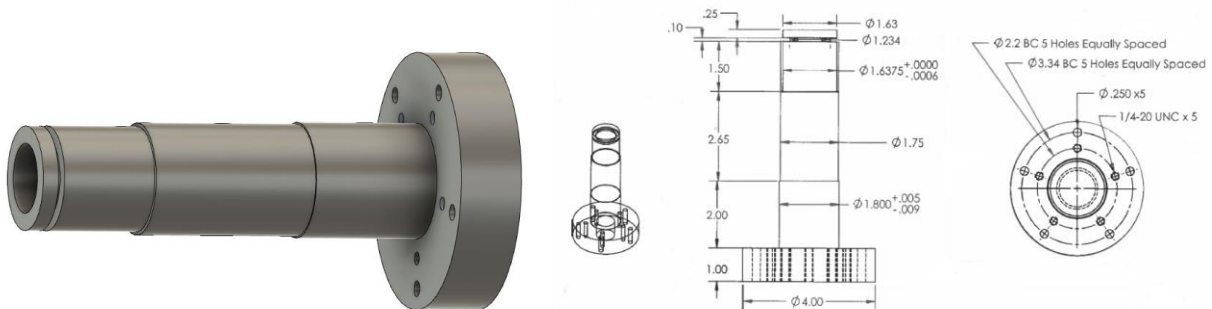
Example of a shaft housing designed by a mechanical engineering senior design team for a linear actuator. This would be much more practical to machine if it were machined as two parts instead and then either welded or press-fit together.
